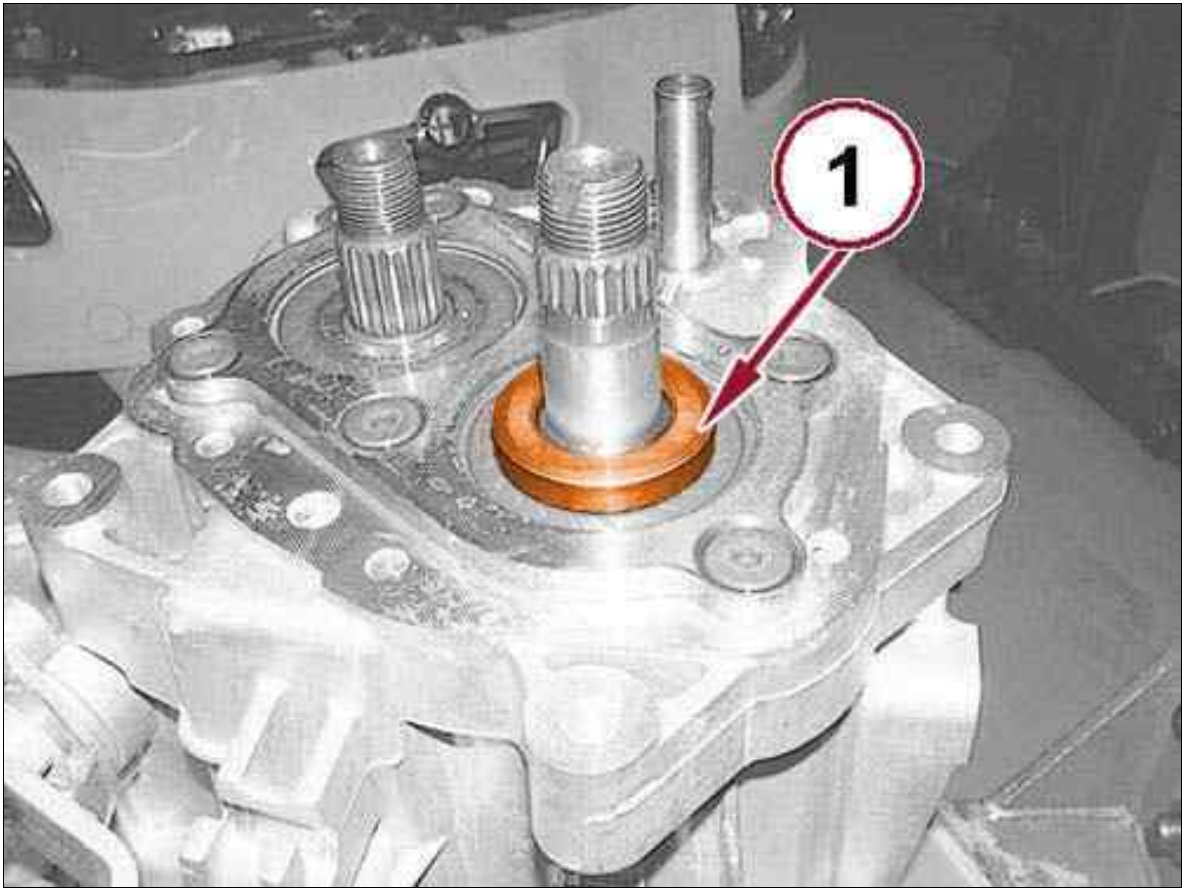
Suitable Puller & 5th Gear Drive Gear Bushing
